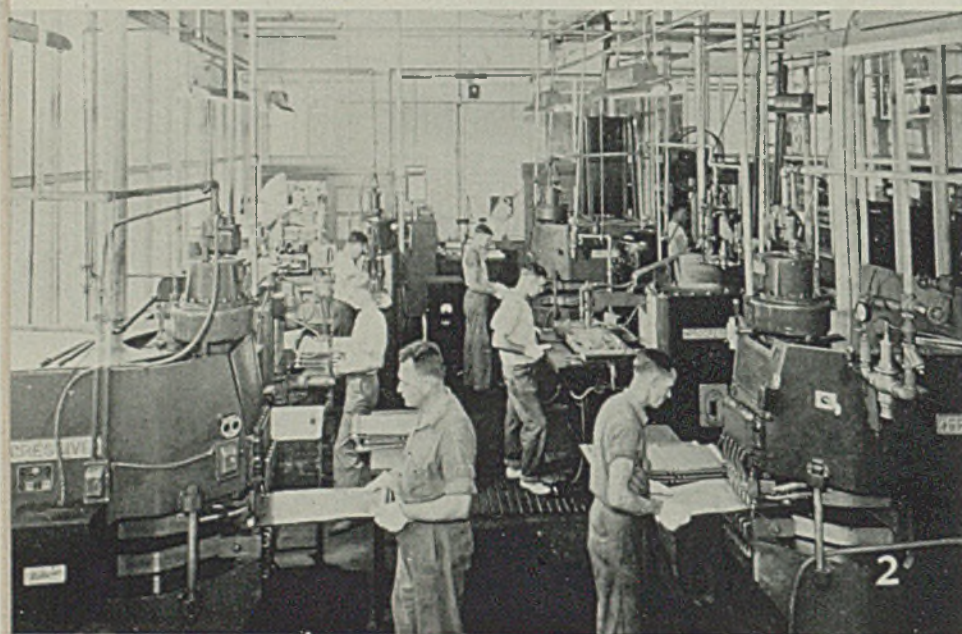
Projection welder used to secure mounting brackets and thermostat clips to fabricated evaporator
